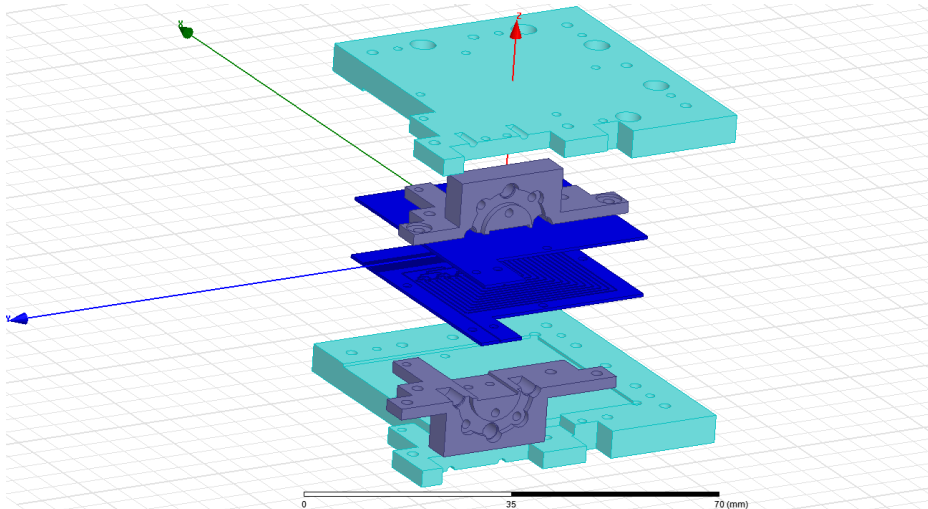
3D breakdown of the two silicon circuits with the top and bottom halves of the casing and separate flange pieces.
